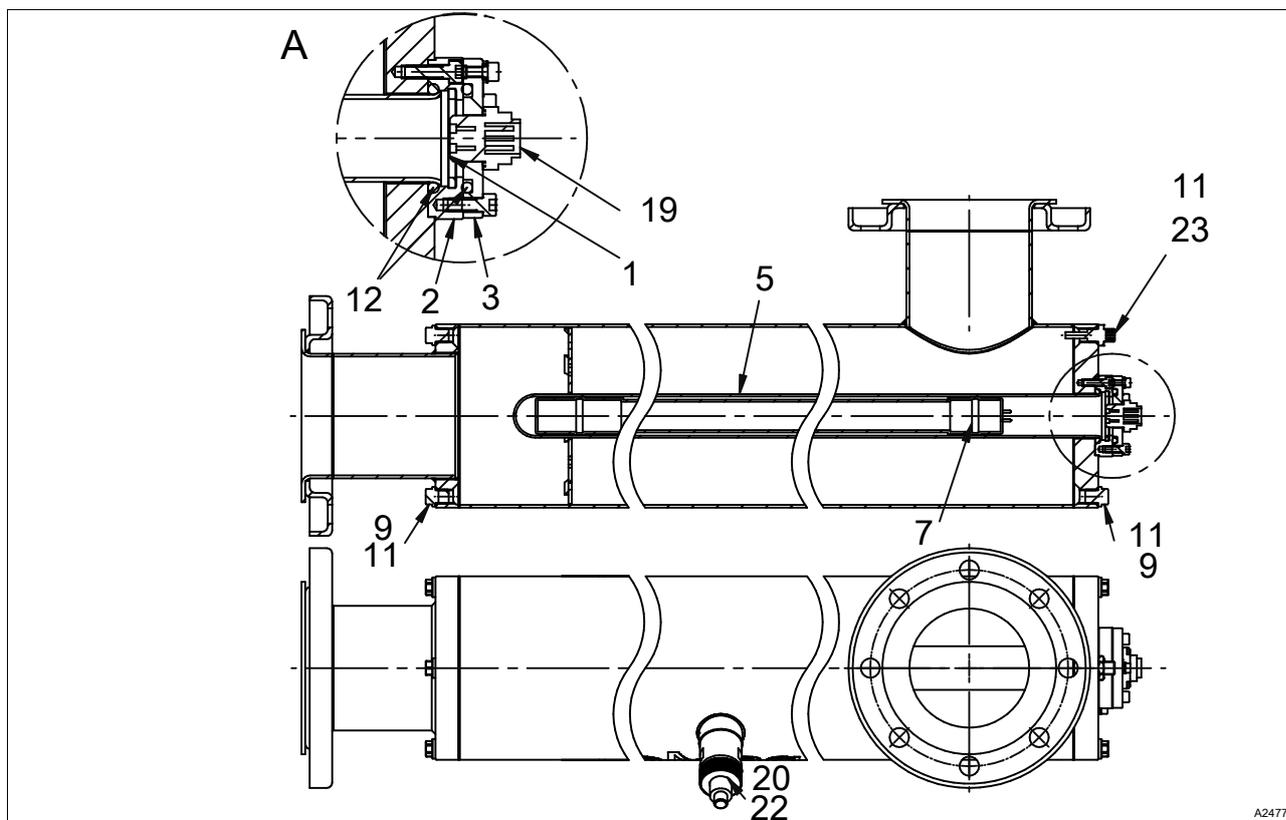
Spare parts, 230 W, single lamp system without wiper
